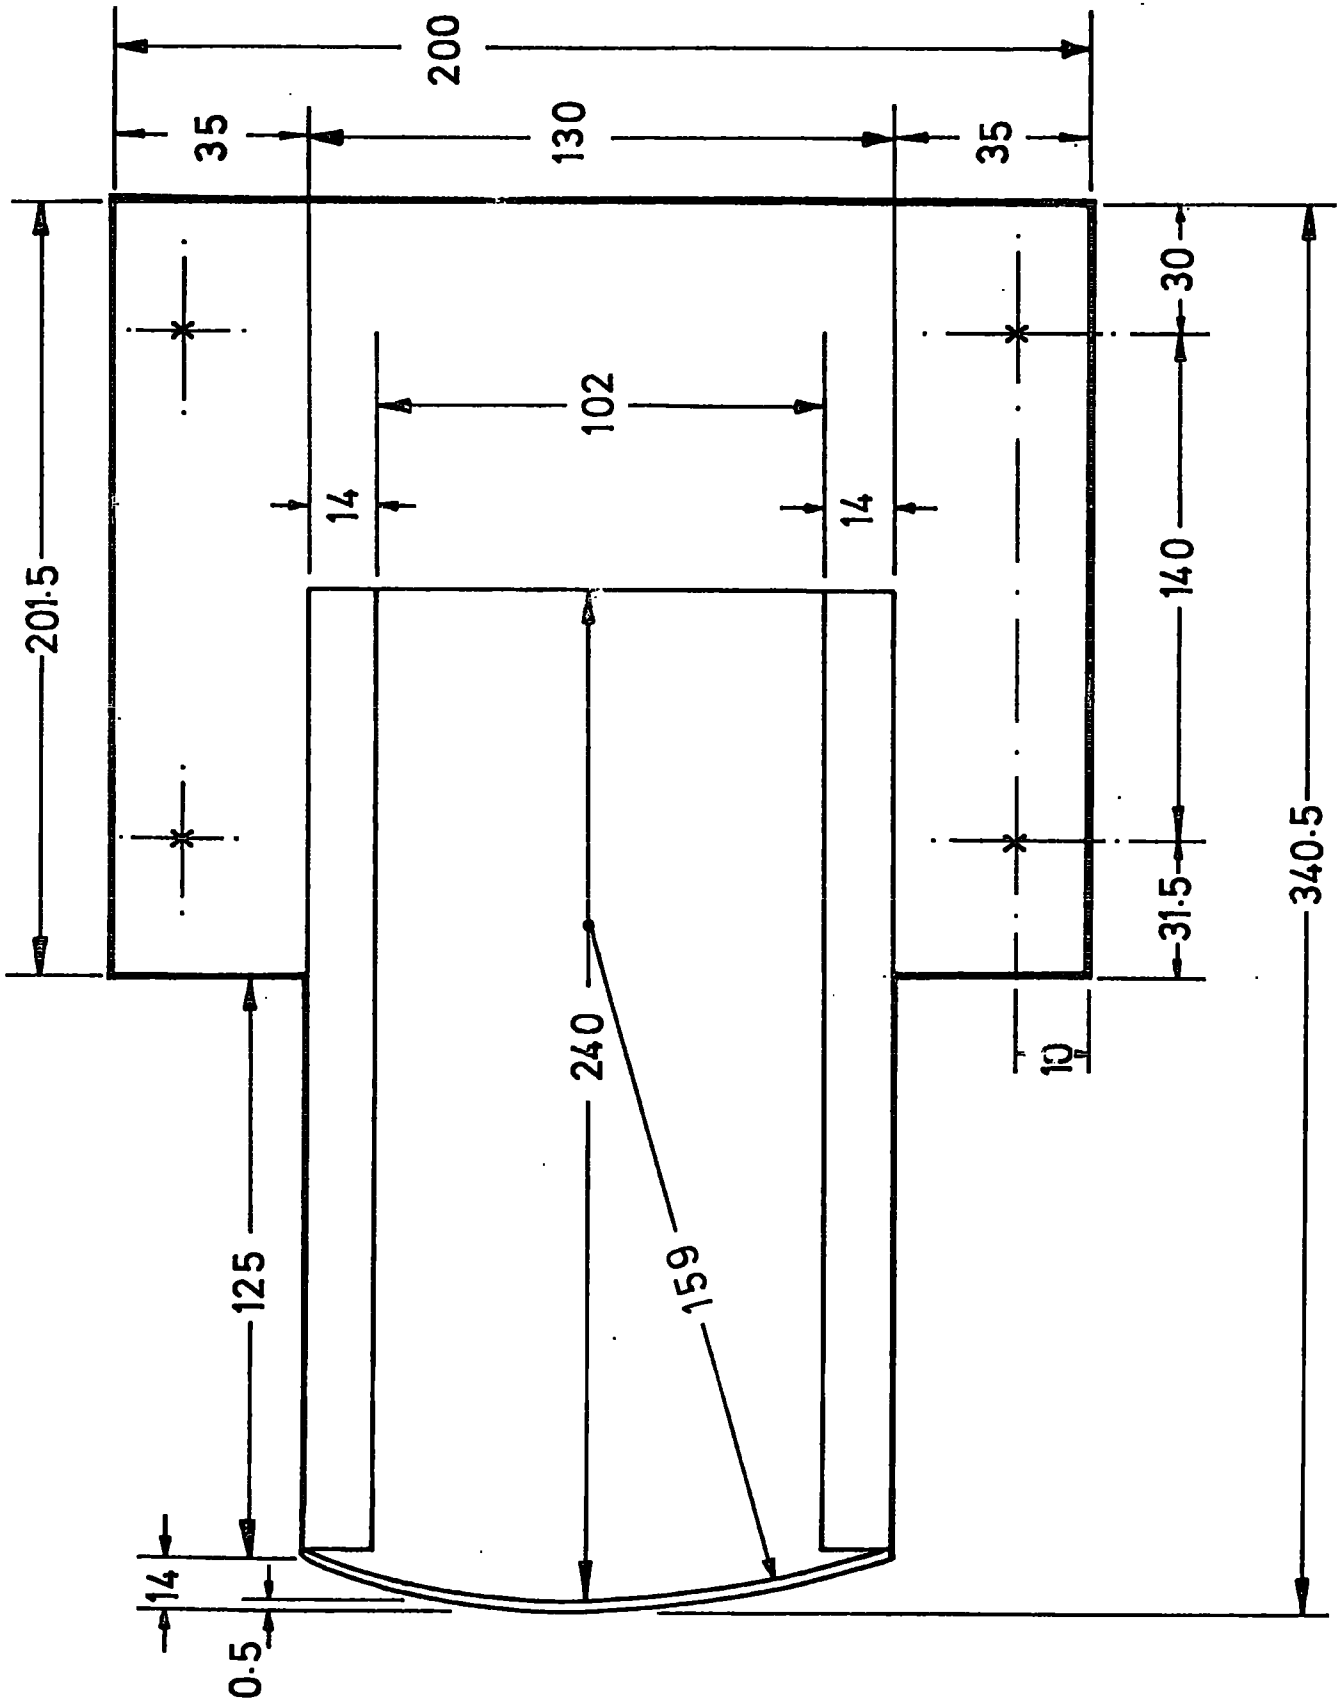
PRINCIPLE CHAMBER DIMENSIONS
